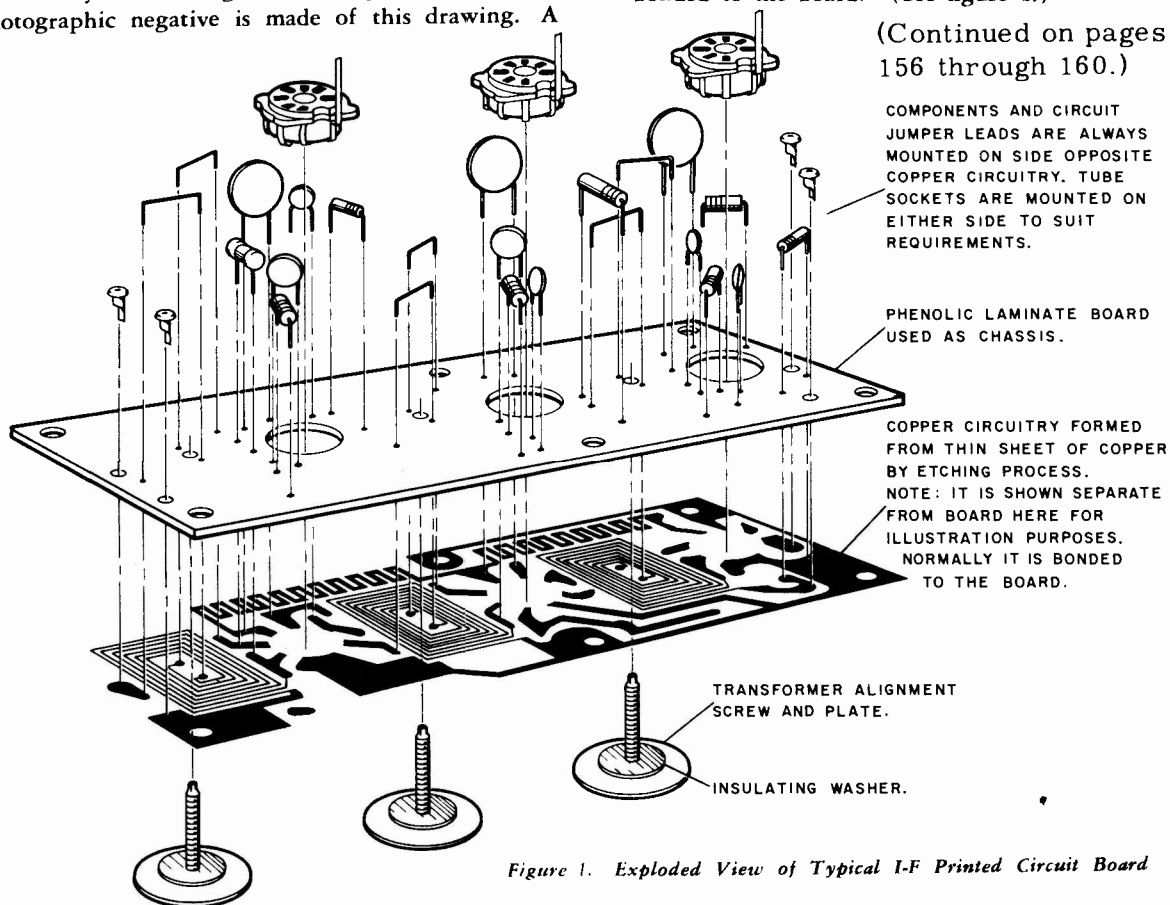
Exploded View of Typical I-F Printed Circuit Board
